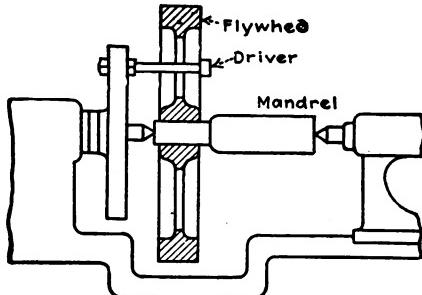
Driving a flywheel on a mandrel with a bolt placed on the face plate
